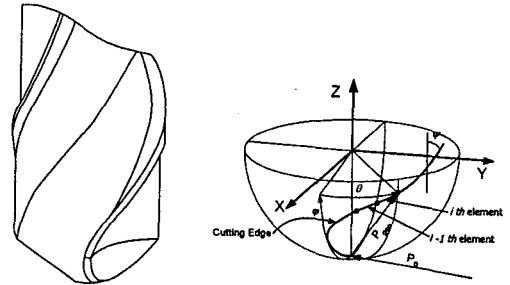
Geometry of ball end mill and positional vector of cutting tooth edge
